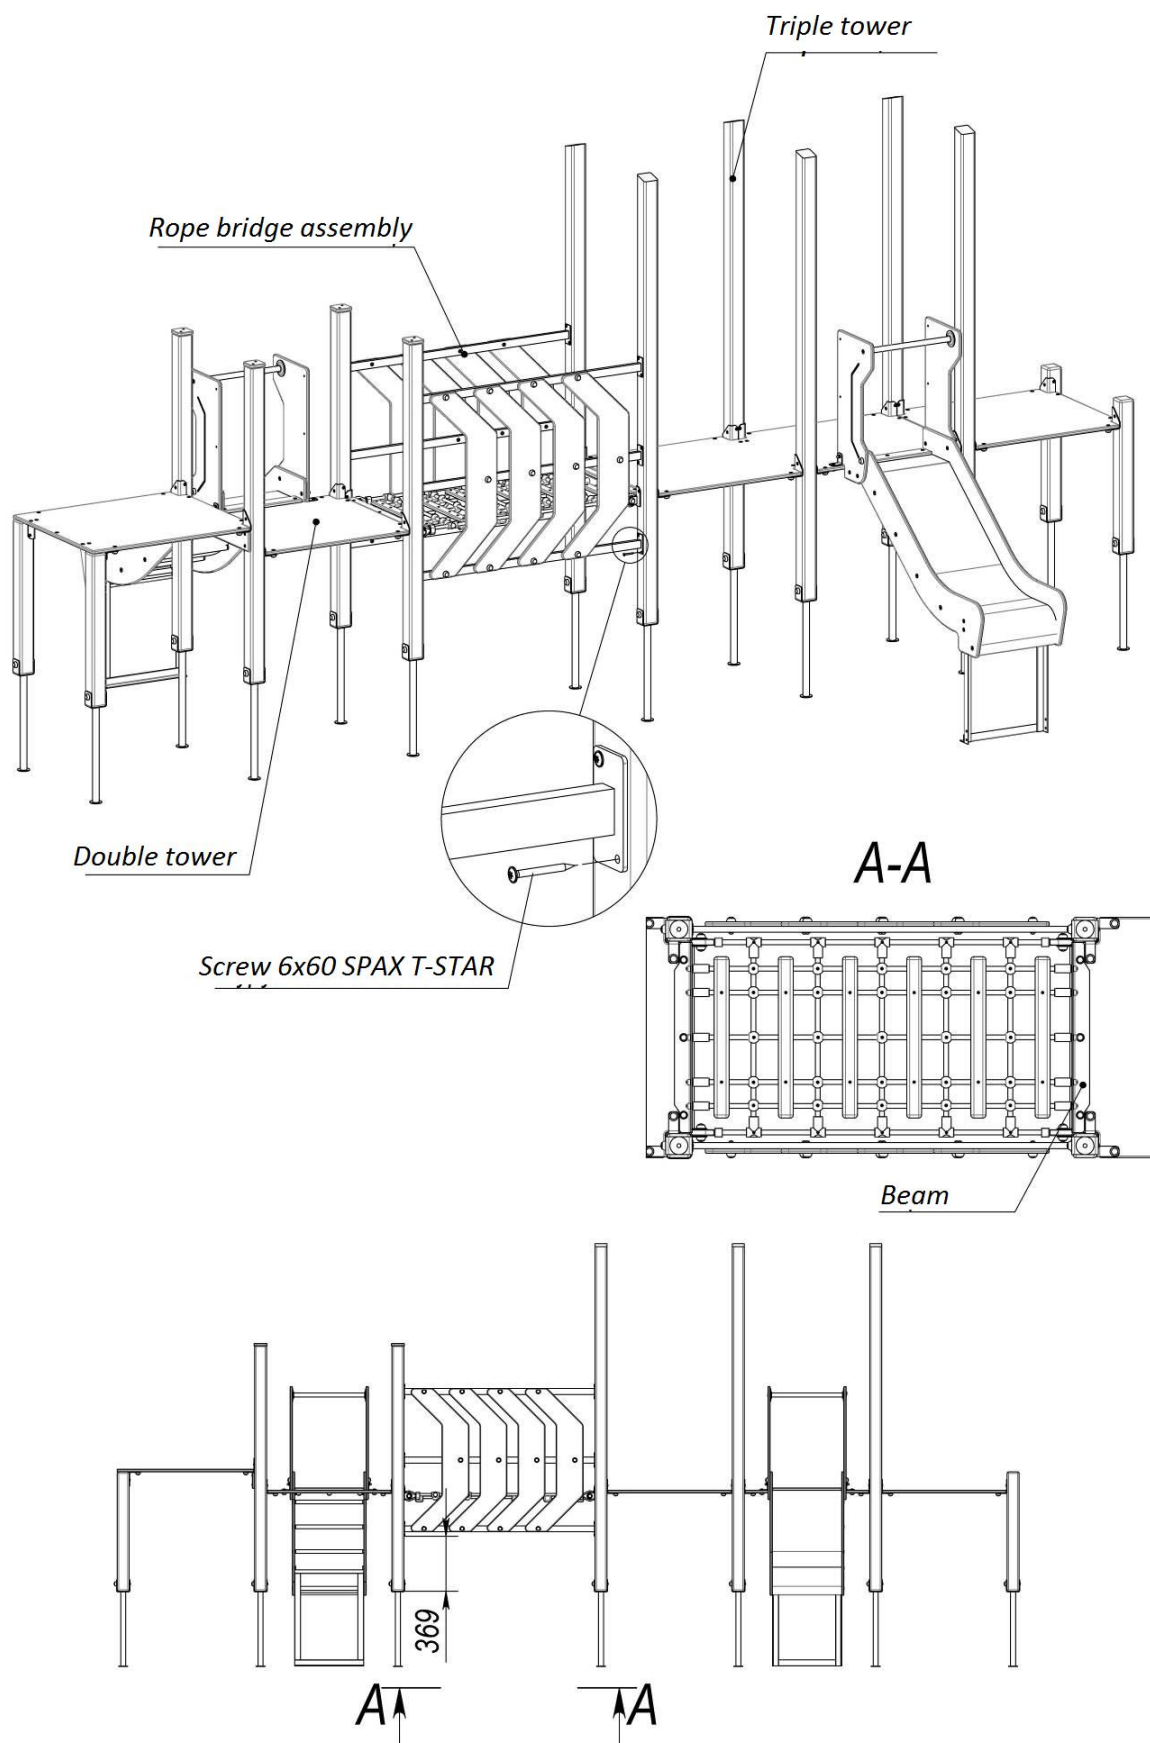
Slides and tower assembly scheme (Identical installation is for double tower and slide)
